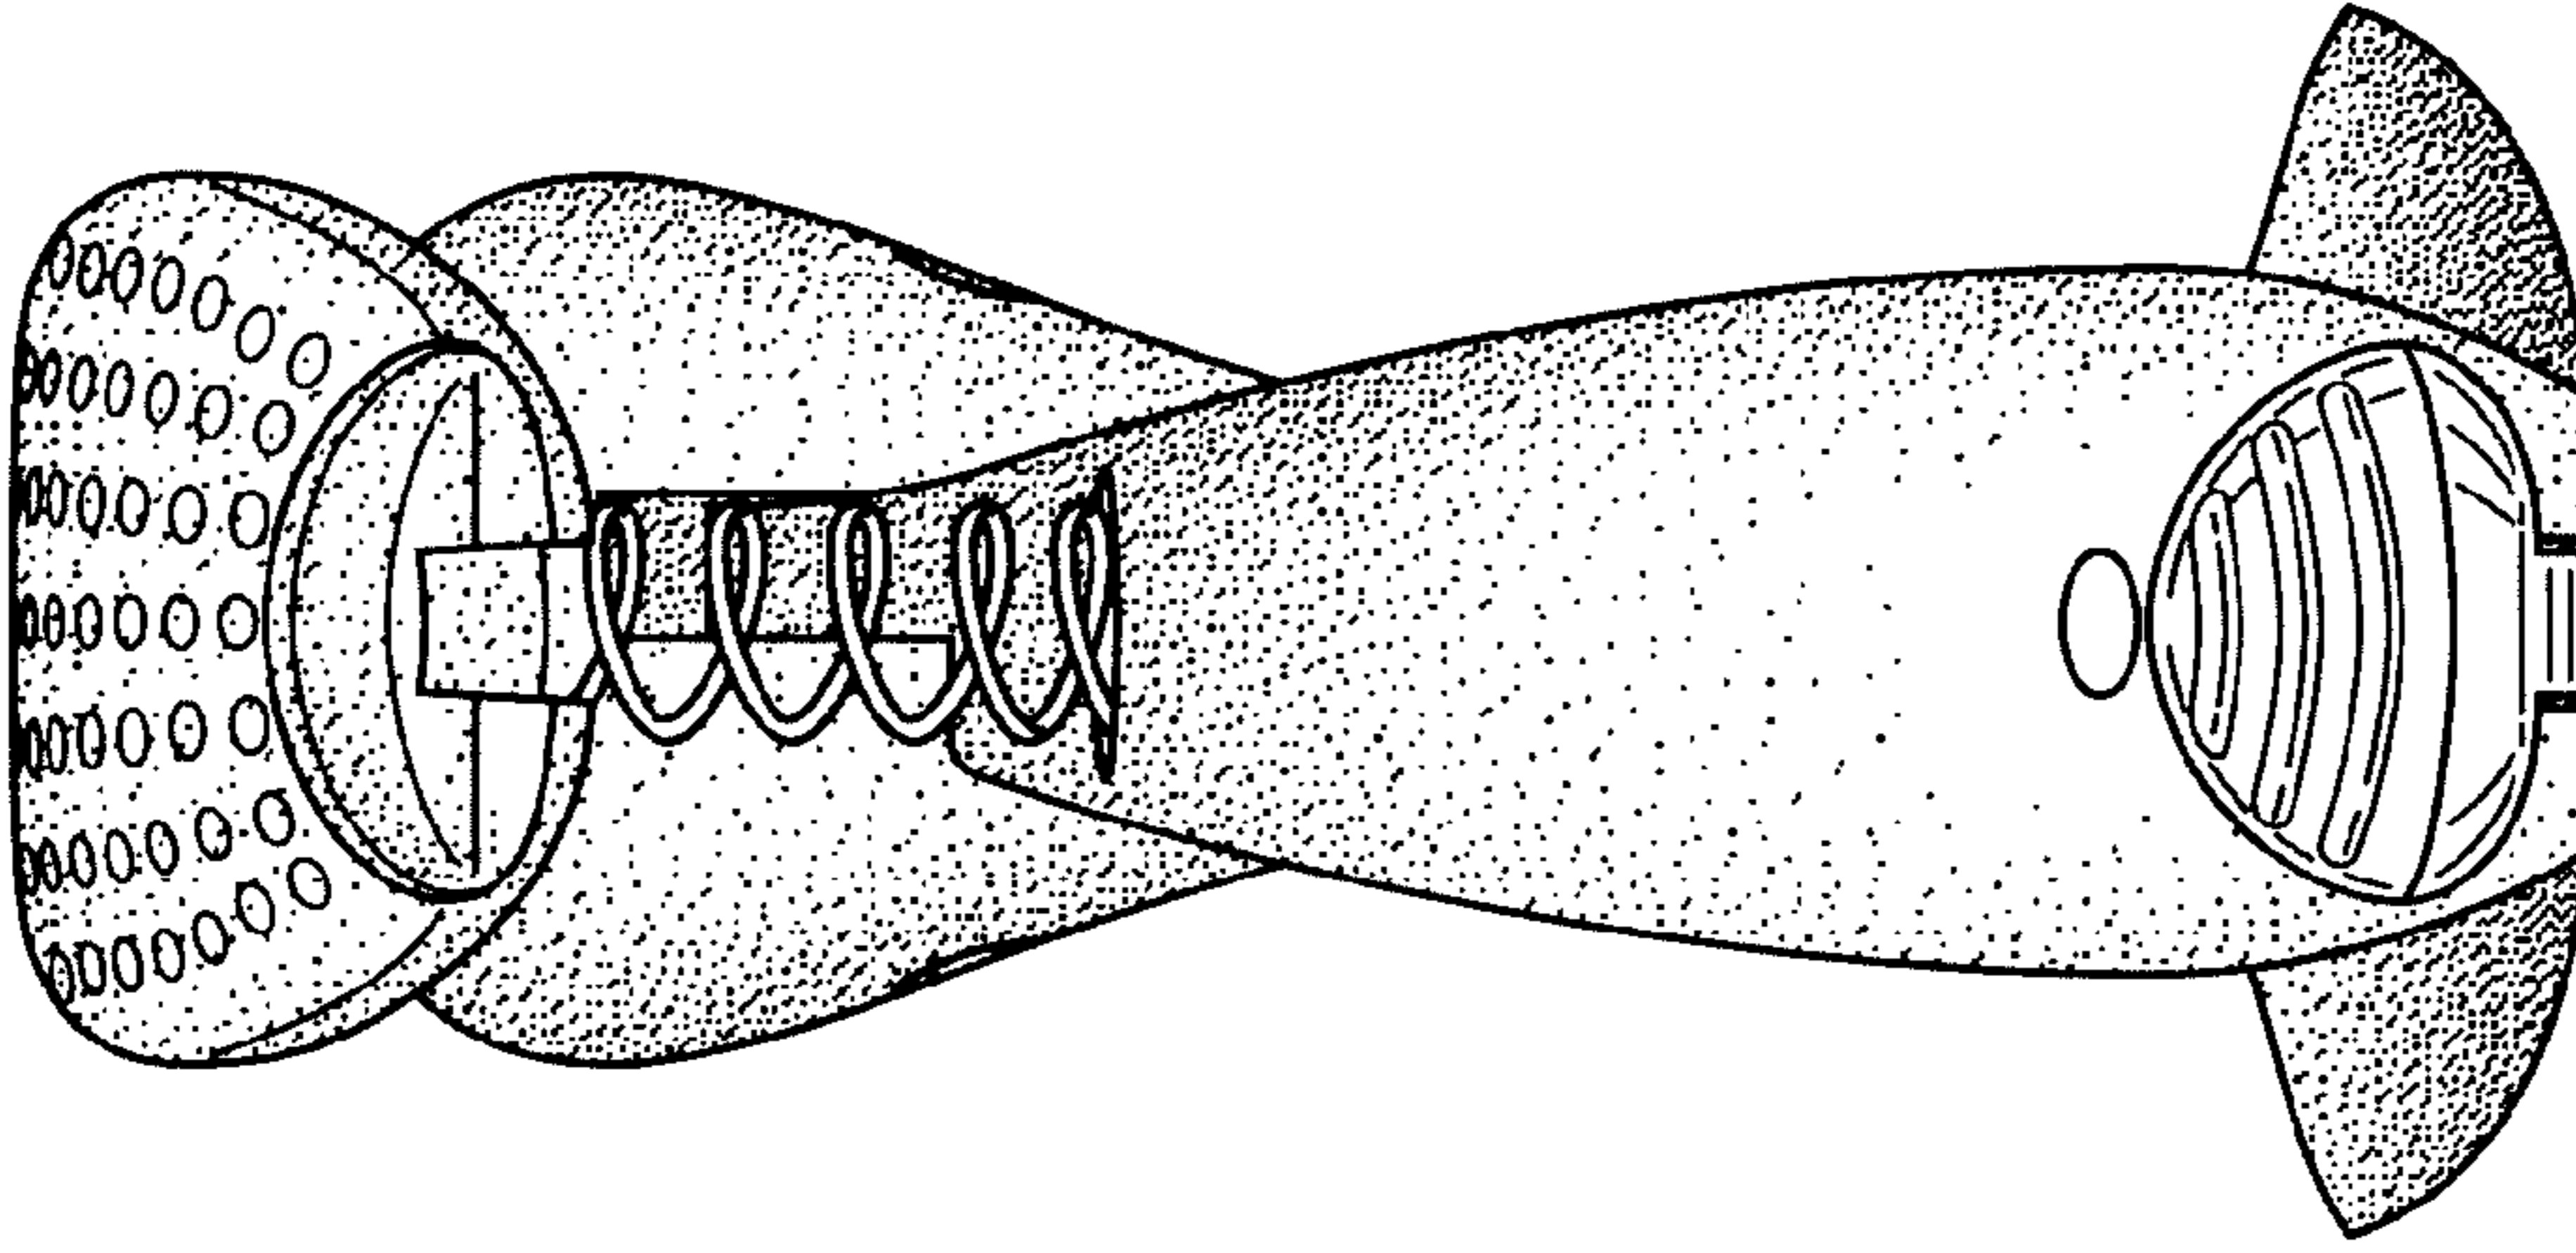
is a perspective view of the cutting device; FIG. 2 is a front view of the cutting device; FIG. 3 is a rear view of the cutting device; and FIG. 4 is a left side view of the cutting device; FIG. 5 is a right side view of the cutting device; FIG. 6 is a top view of the cutting device; FIG. 7 is a bottom view of the cutting device; and, FIG. 8 is a perspective view of the cutting device from the rear, with the cutting device in a locked position.
